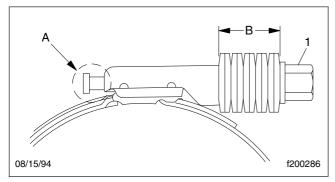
, Breeze Constant-Torque Hose Clamp Installation
